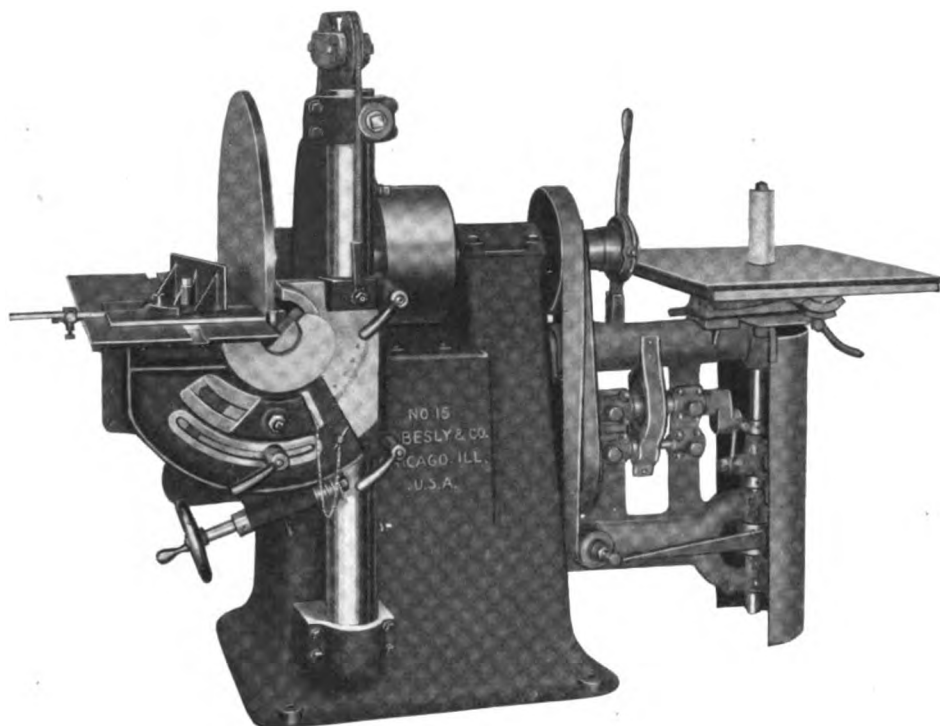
Besly No. 15 Pattern Makers' Grinder, Ring Oiling
